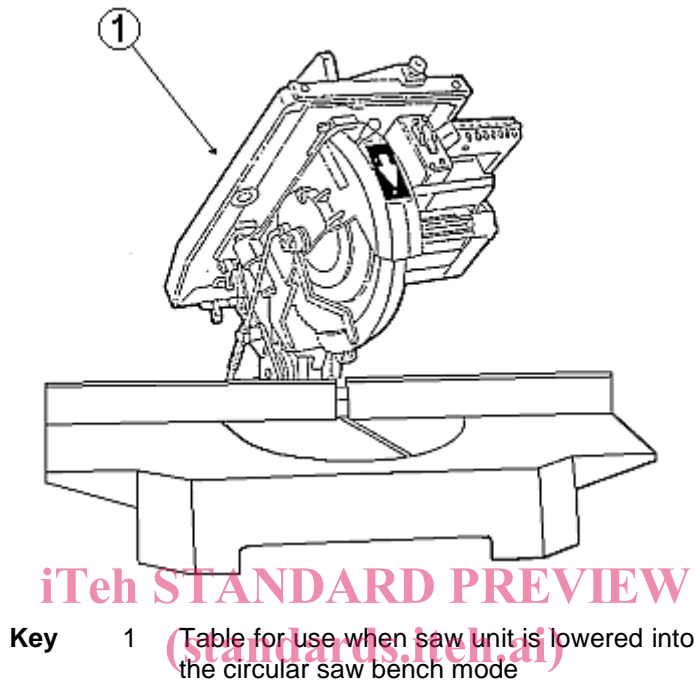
Example of a dual purpose down cutting cross-cut saw/circular saw bench
